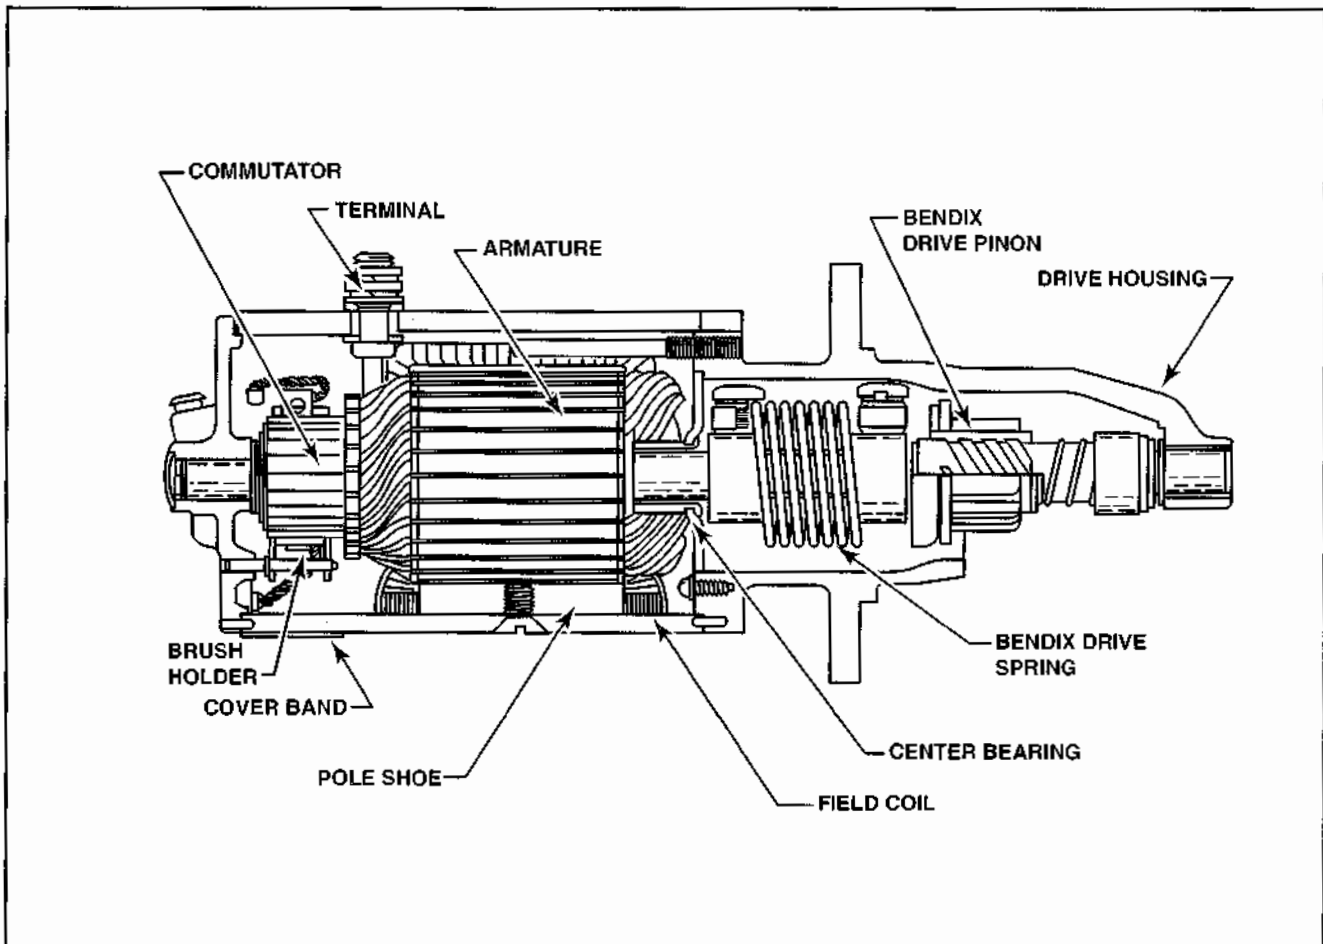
A direct-cranking starter uses a Bendix drive to turn the starting gear (flywheel) on an engine. When the engine starts, inertia created by the flywheel spins the Bendix pinion gear away from the flywheel. Many Textron-Lycoming engines use this type of starter.
